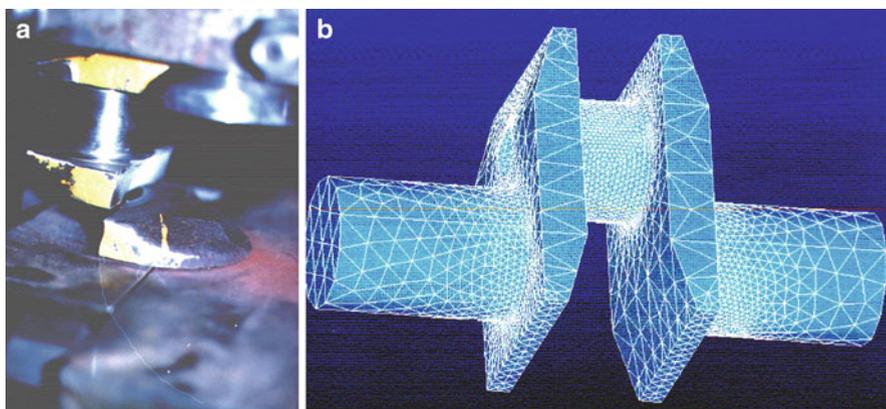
Crankshaft: (a) fatigue breaking of crankshaft web; (b) finite-element mesh for crank of a crankshaft
